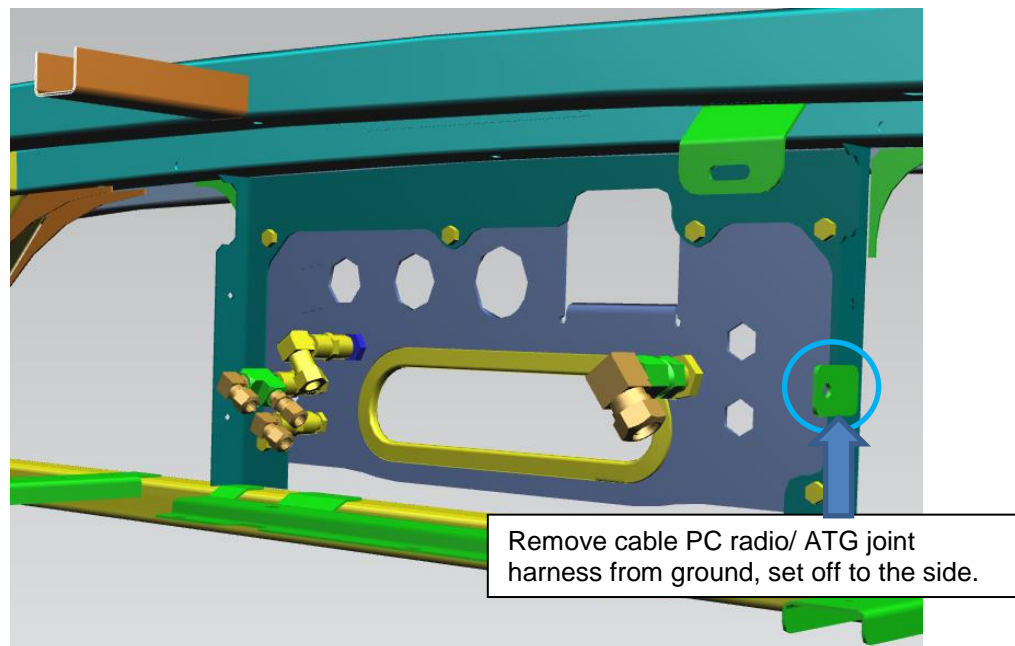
A: VIEW OF CABLE TO BE REMOVED
